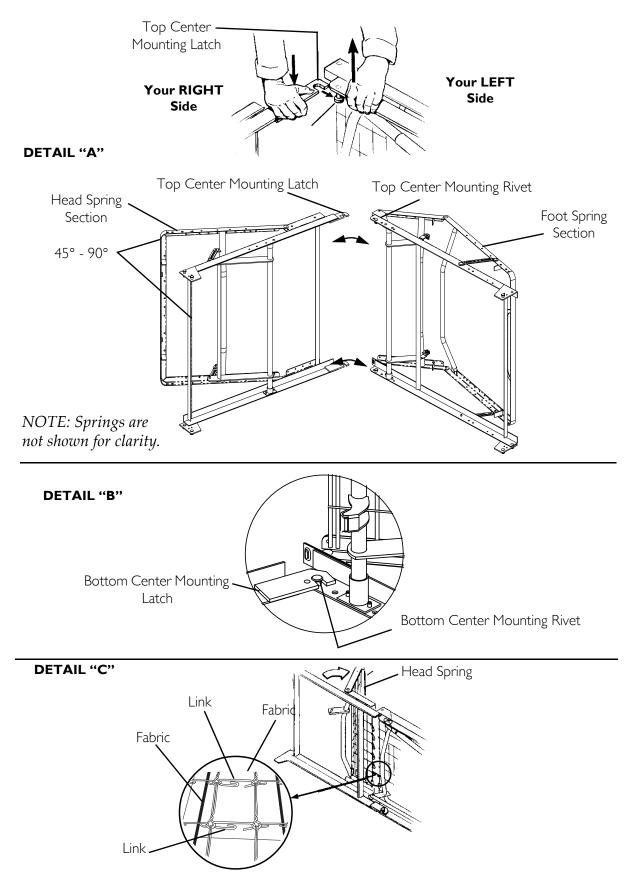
Assembling the Head and Foot Spring Sections
